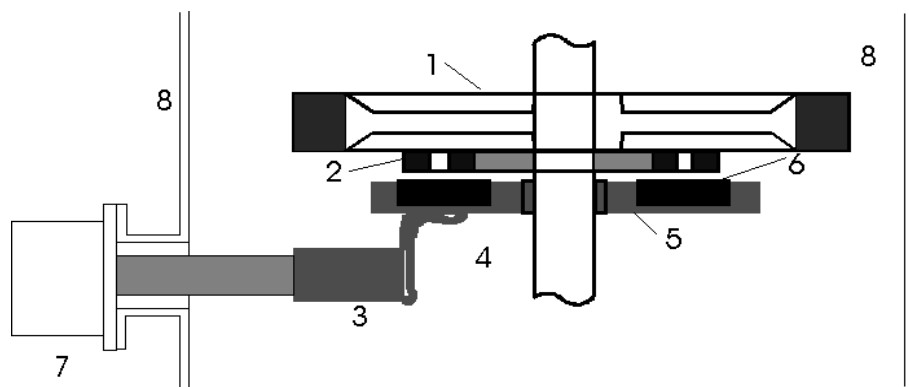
Construction of superconducting bearing of the Karlsruhe group. 1: Flywheel disc. 2: Permanent magnet. 3: Coldhead. 4: Flexible copper lead. 5: Cold plate. 6: Superconducting ring. 7: Cryocooler. 8: Vacuum chamber.
